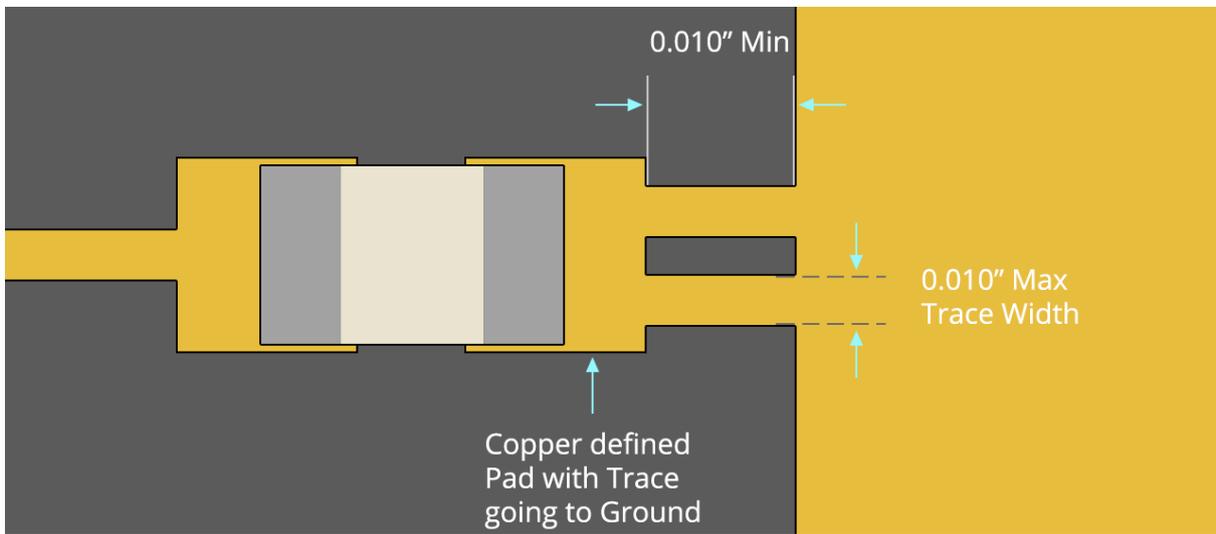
Connecting Large Traces to Component Lands (Good Design)
